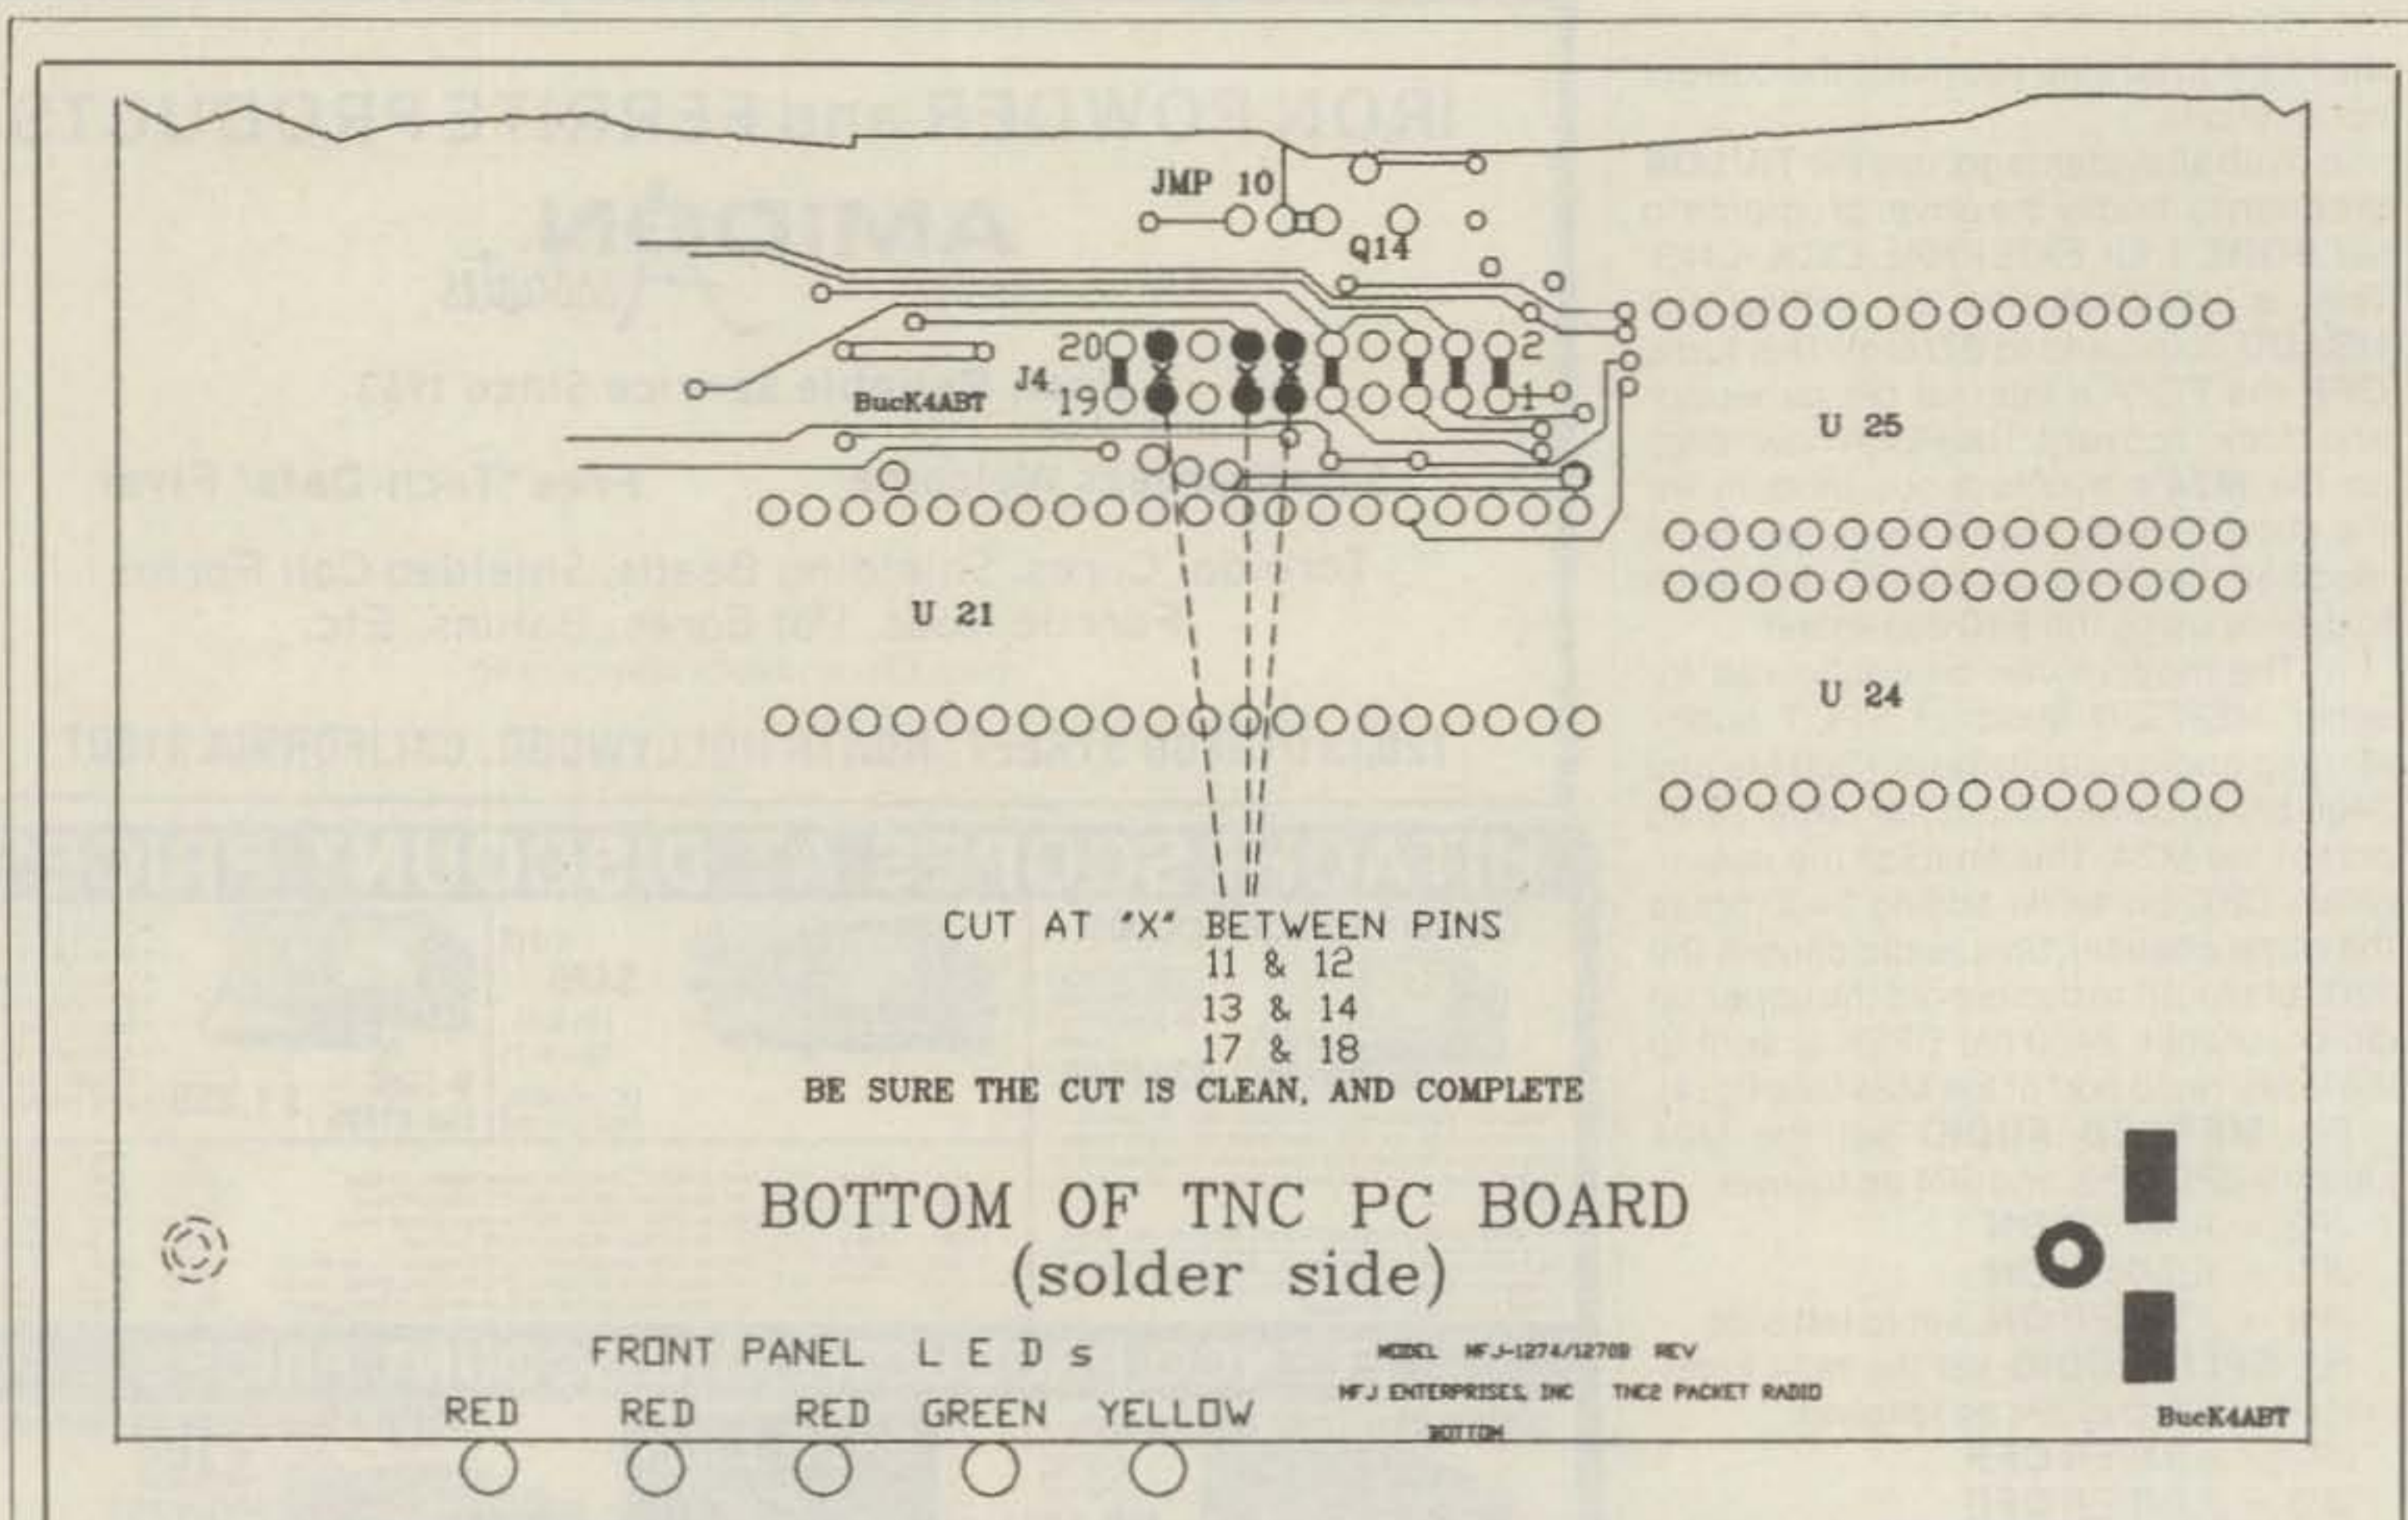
Bottom of the MFJ-1274/1270B (TNC2 clone) PC board.
